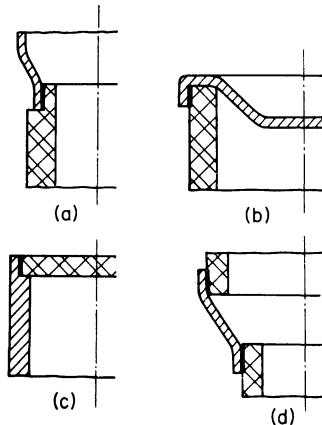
Cylindrical ceramic–metal outside seal: (a) tubular seal; (b) metal window seal; (c) ceramic window seal; (d) elastic seal
